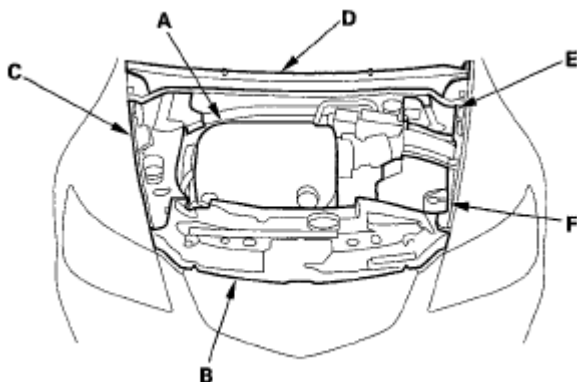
Identifying Intake Manifold Cover, Cowl Cover Upper Trim, Upper Grille Cover And Battery Trim
